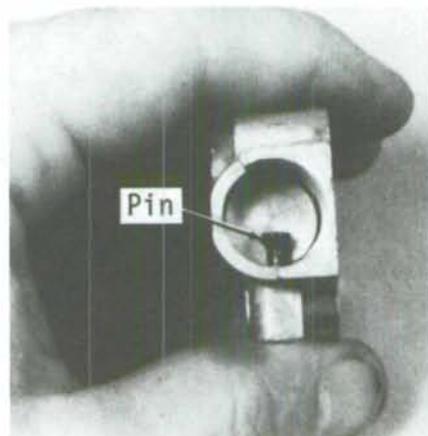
When disassembling oil pump, press the spring-loaded plunger in while removing the cam pin from the pump housing.
